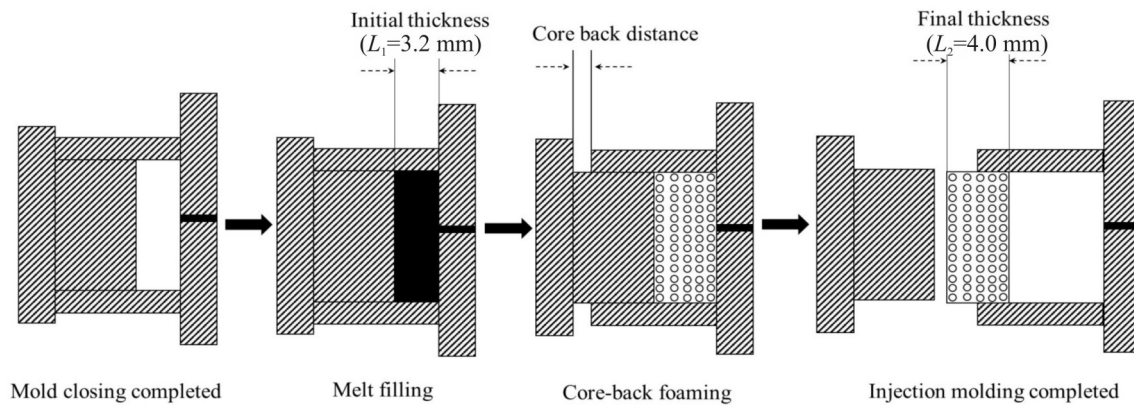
Core-back injection molding process to fabricate PBAT foams
